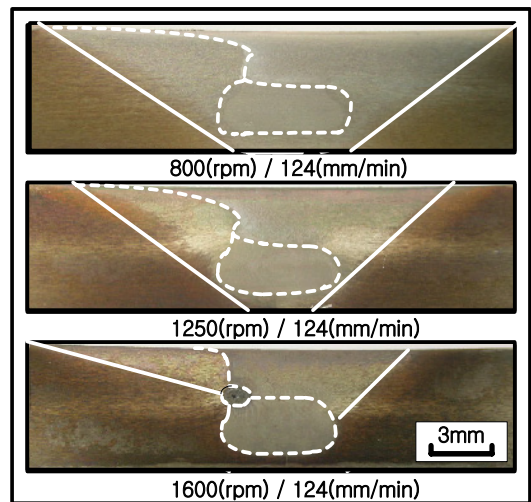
Welded transverse cross-section macrostructures according to the welding speeds(800rpm, 1250rpm and 1600rpm) and the transition speed 15mm/min with half screw type tool.
